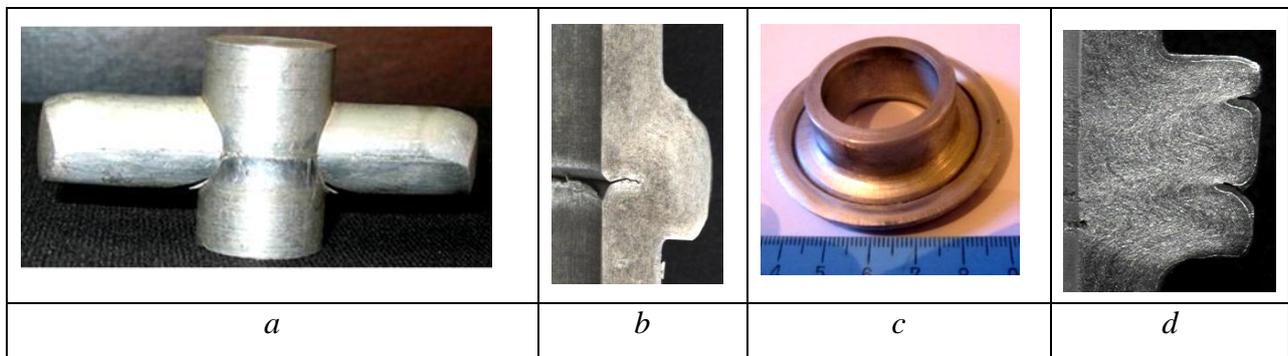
Fracture of the ledge (*a*) and distortion of the flange shape (*b–d*)
